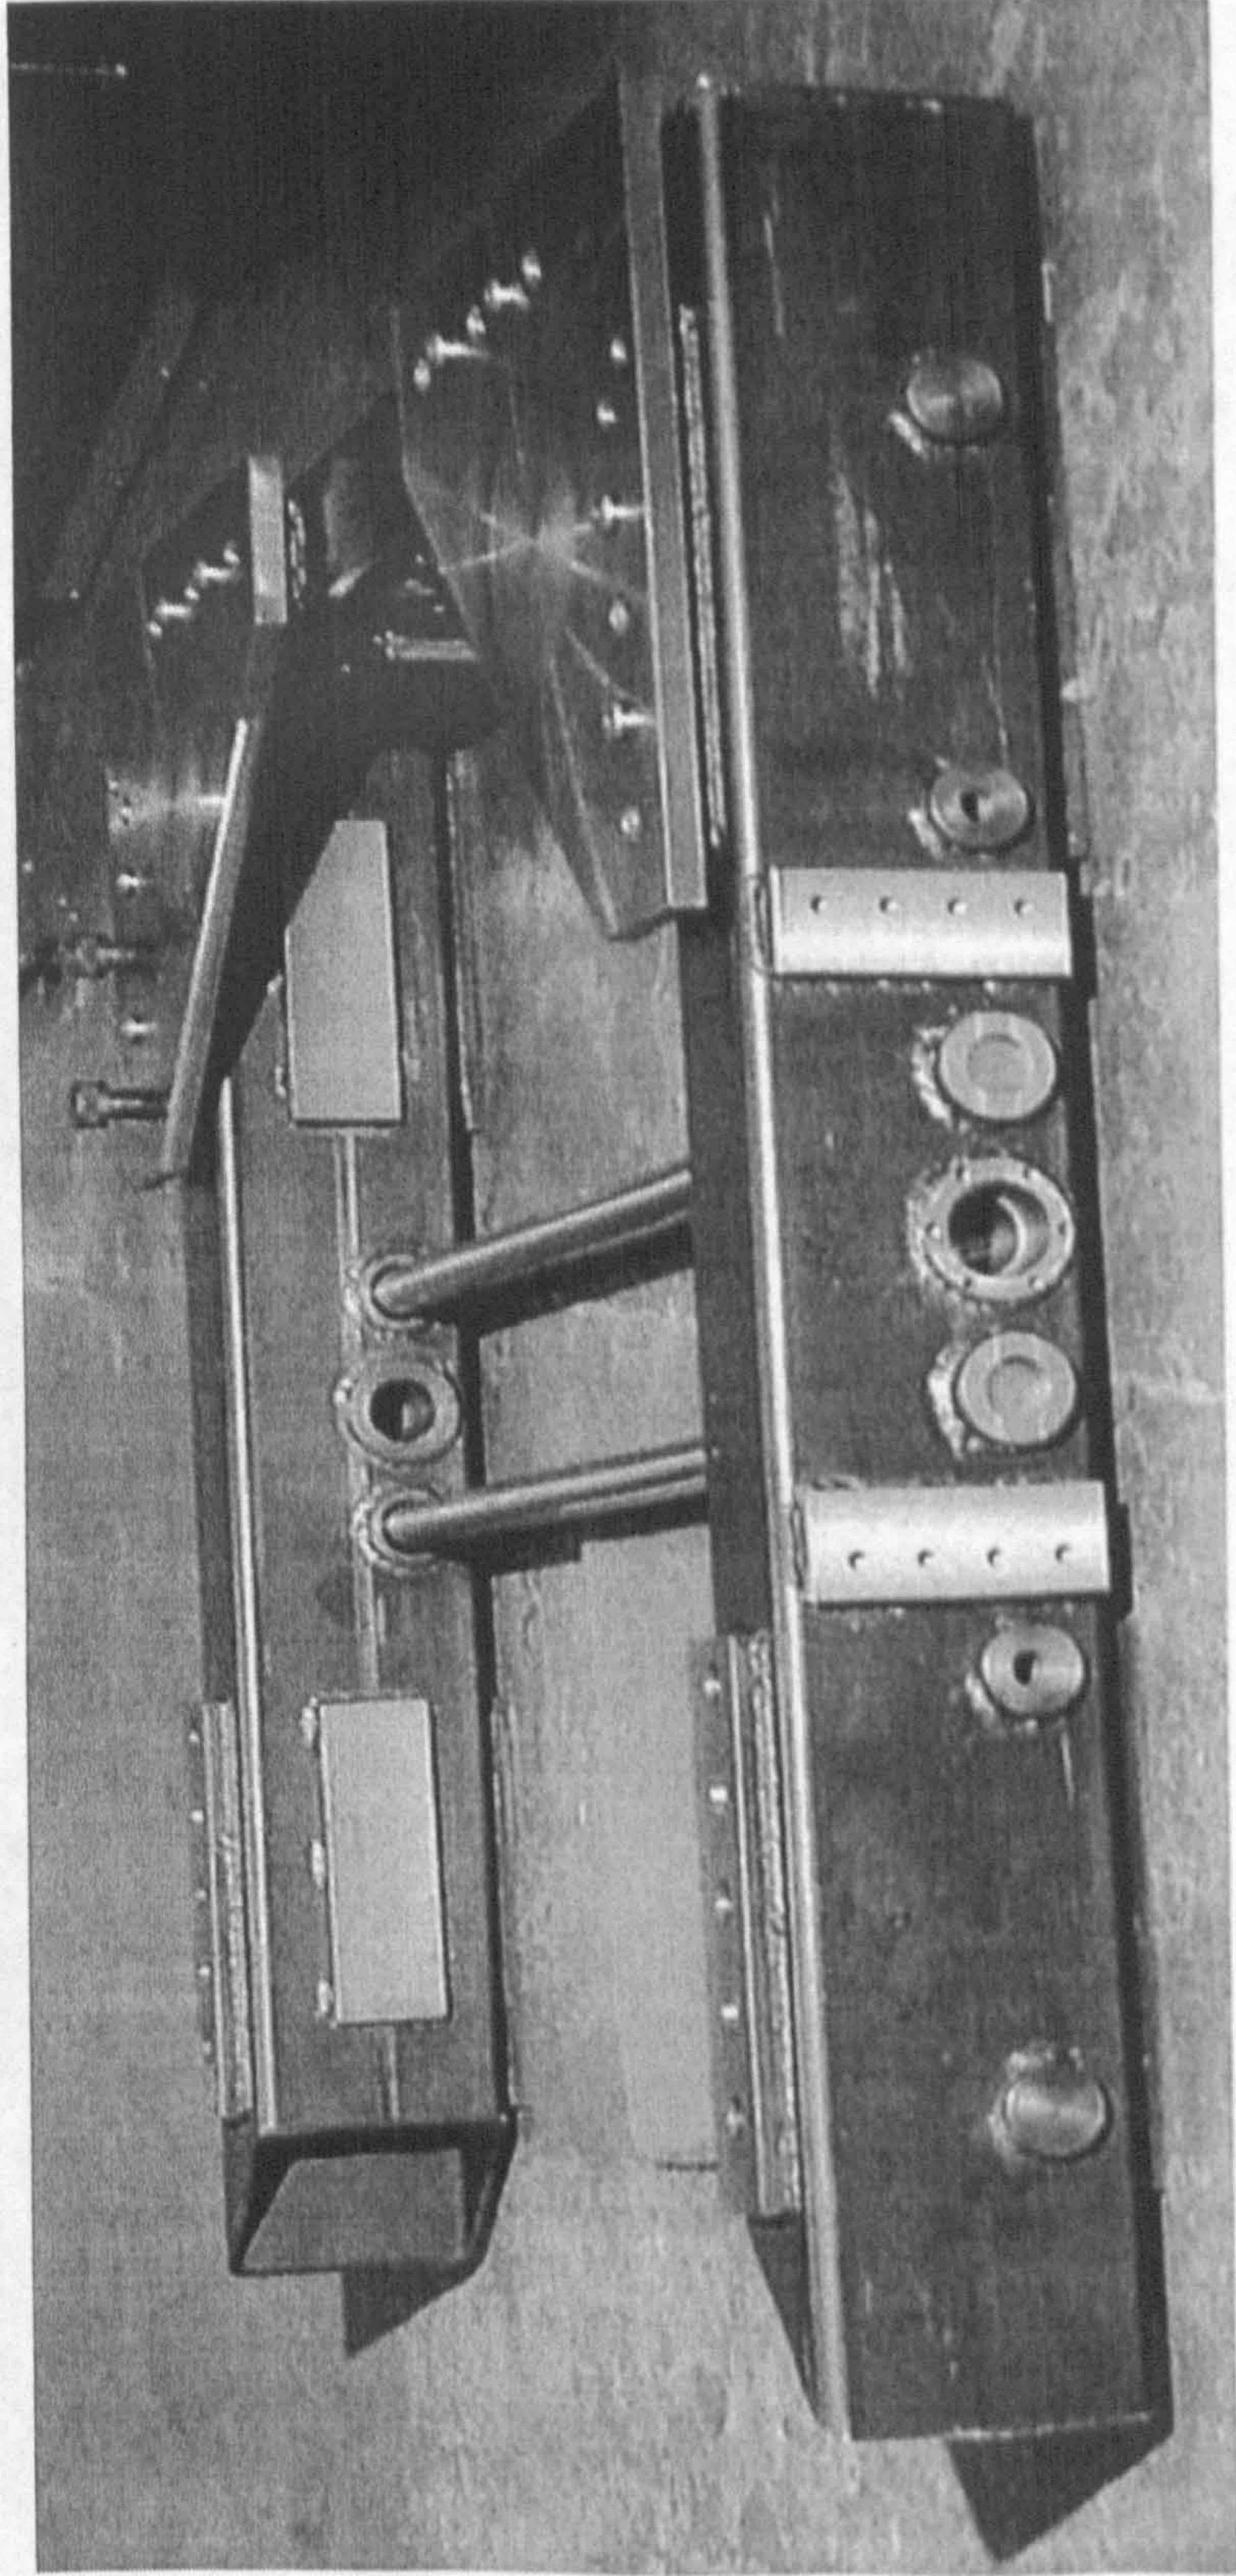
The frames and bottom corner plates in their working place Lab (M3) for the final assembling
